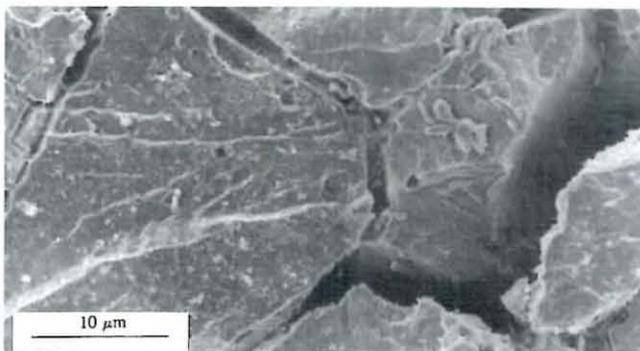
Fracture surface of a sulphide stress-corrosion crack in steel A, showing largely transgranular fracture (secondary electron image, accelerating voltage 8 kV)
